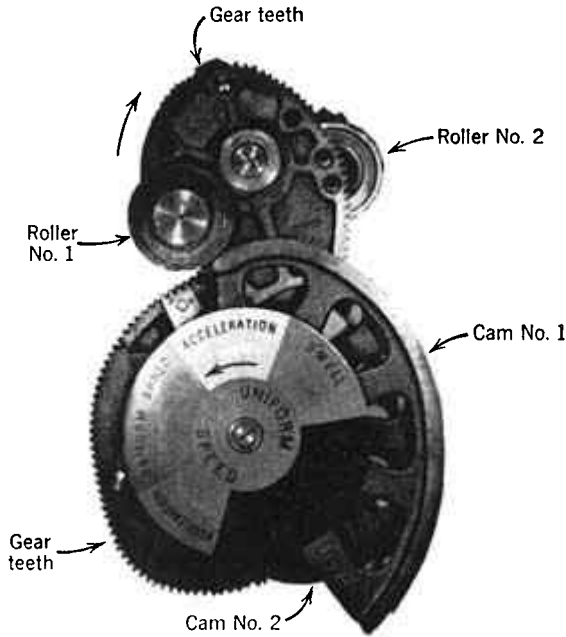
Cam-modulated mechanism—epicyclic gears and fixed cam.
